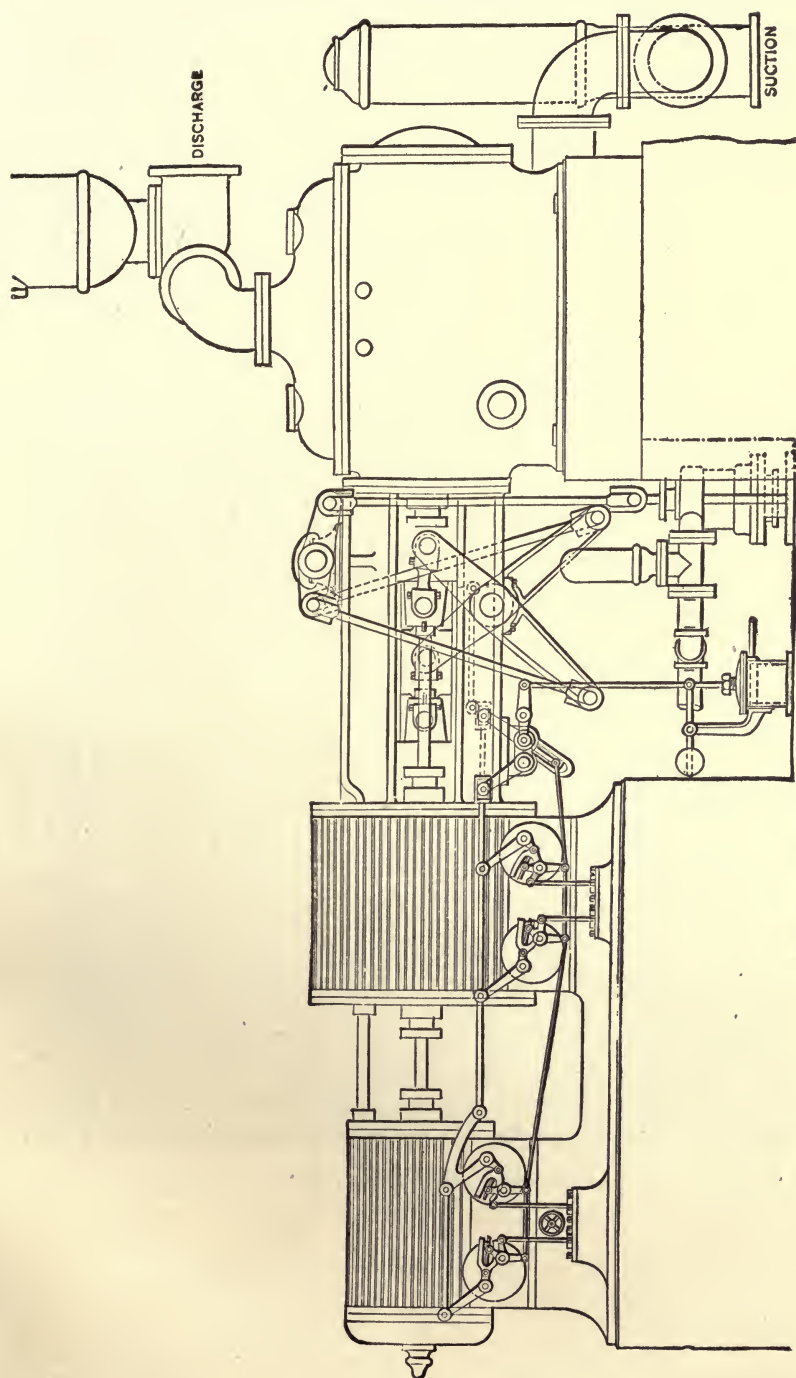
Side Elevation of Gresham Pumping Engine.
